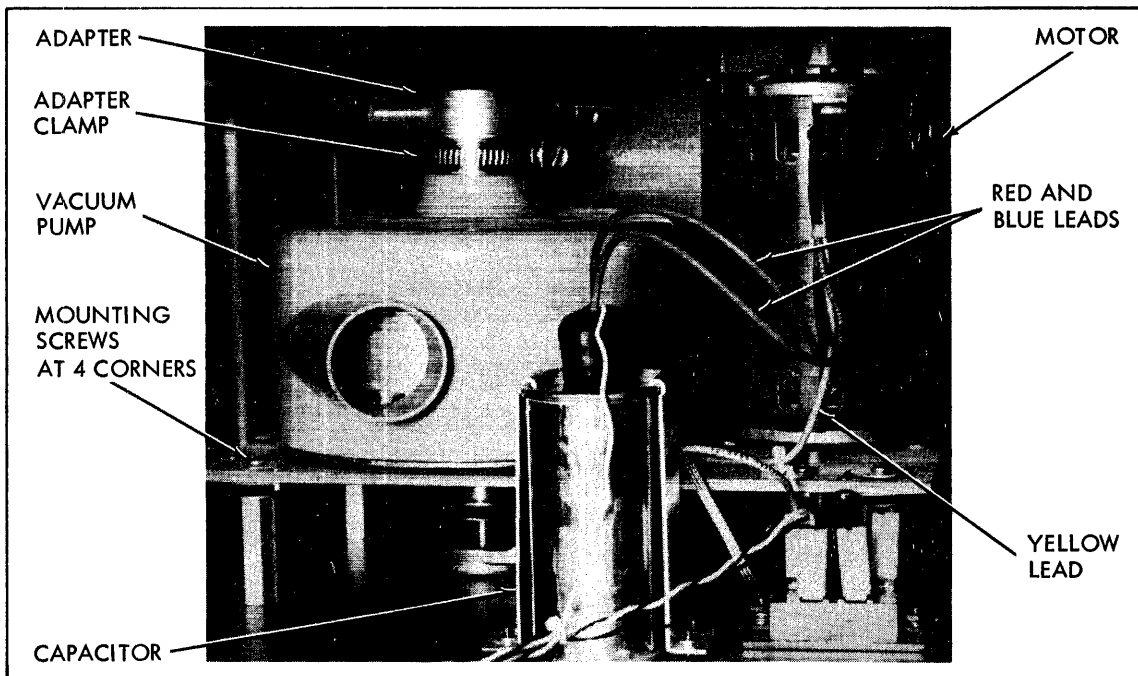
Bottom Vacuum Pump Assembly Removal
